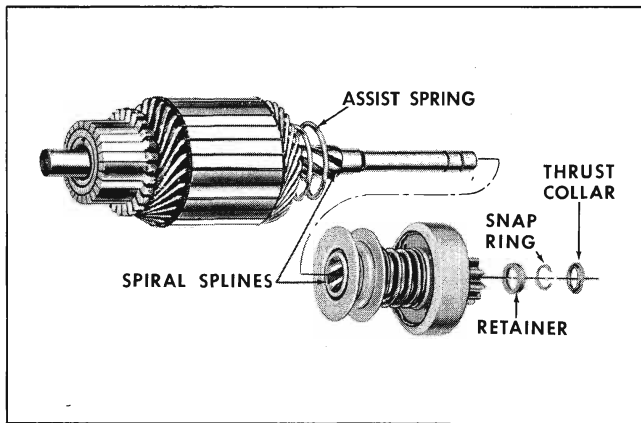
Armature and Overrunning Clutch Assembly—Exploded View
